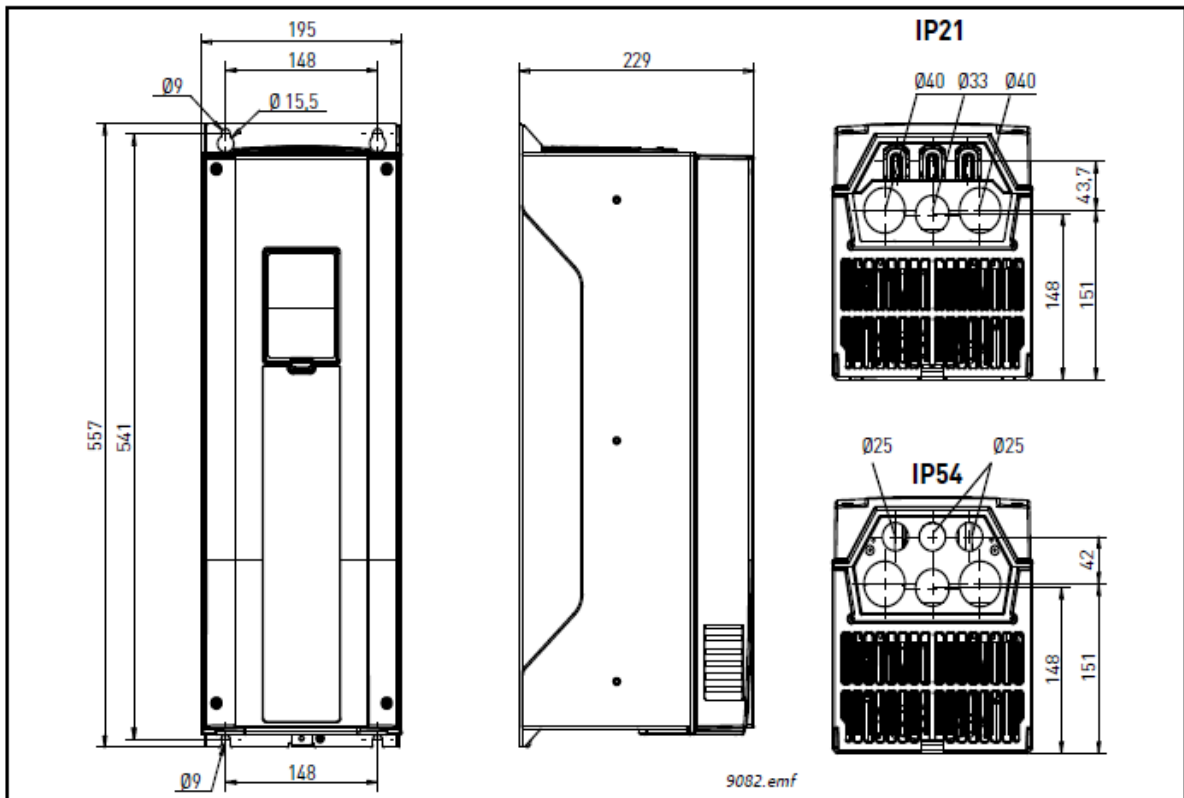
Vacon AC drive dimensions, MR6, wall mount
